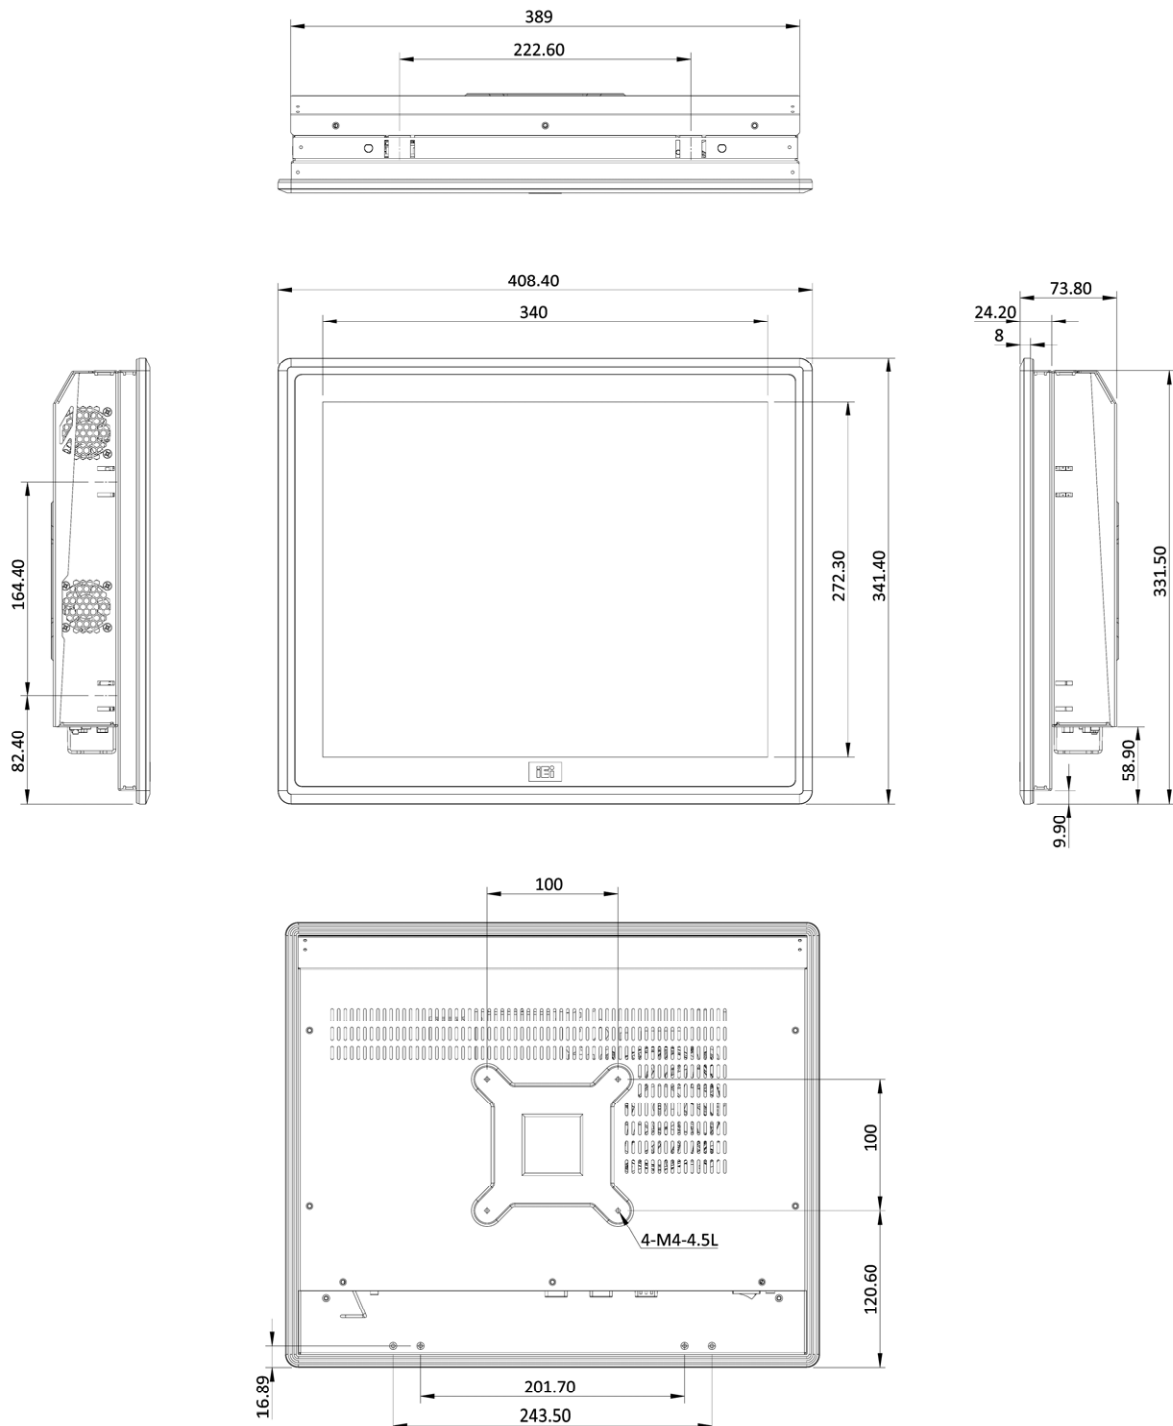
PPC-F17A-H81 Dimensions (mm)
